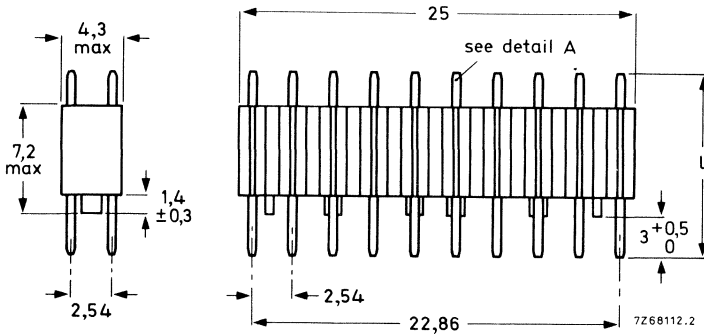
Assembly of 2 x 10 contact pins in a removable mounting block.
